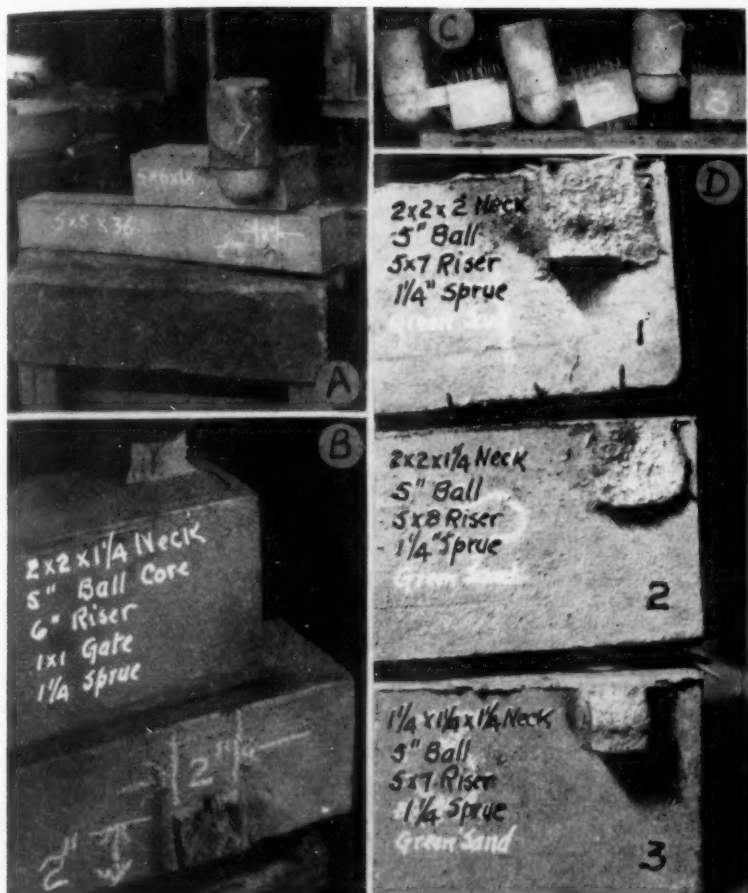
(A) AND (B) TWO COMMERCIAL CASTINGS FOUND TO BE DEFECTIVE—(C) AND (D) THREE EXPERIMENTAL CASTINGS WITH VARIED SIZE NECKS AND RISERS TO DETERMINE CAUSE OF SHRINKAGE IN COMMERCIAL CASTINGS OF (A) AND (B).
